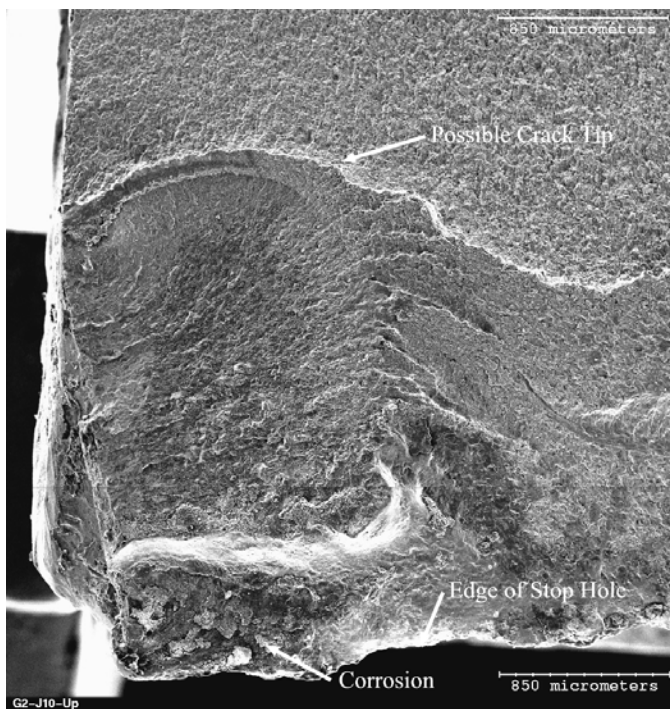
Corrosion of Upward Fatigue Crack Surface at Joint 12, Specimen 1
